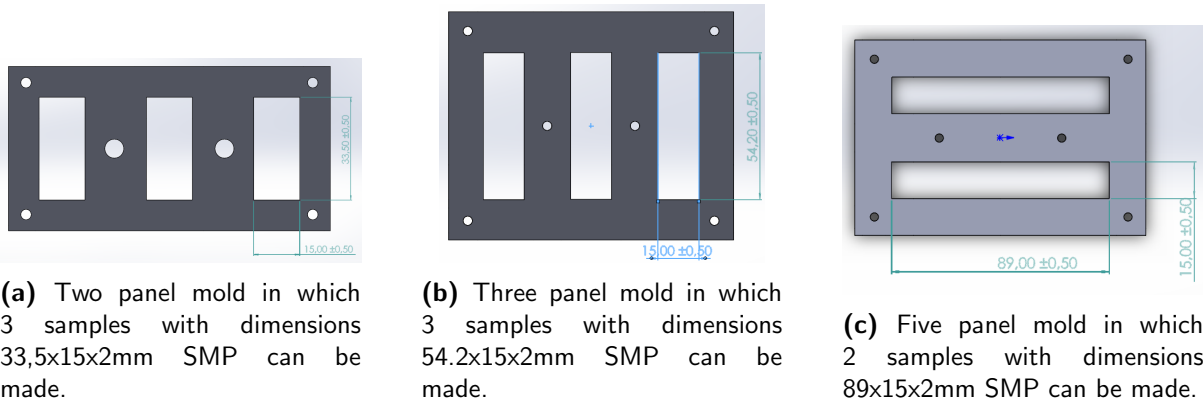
(a) shows the two panel mold, (b) the three panel mold and (c) the five panel mold. Each can make multiple samples and the hinges are not incorporated into the design.
